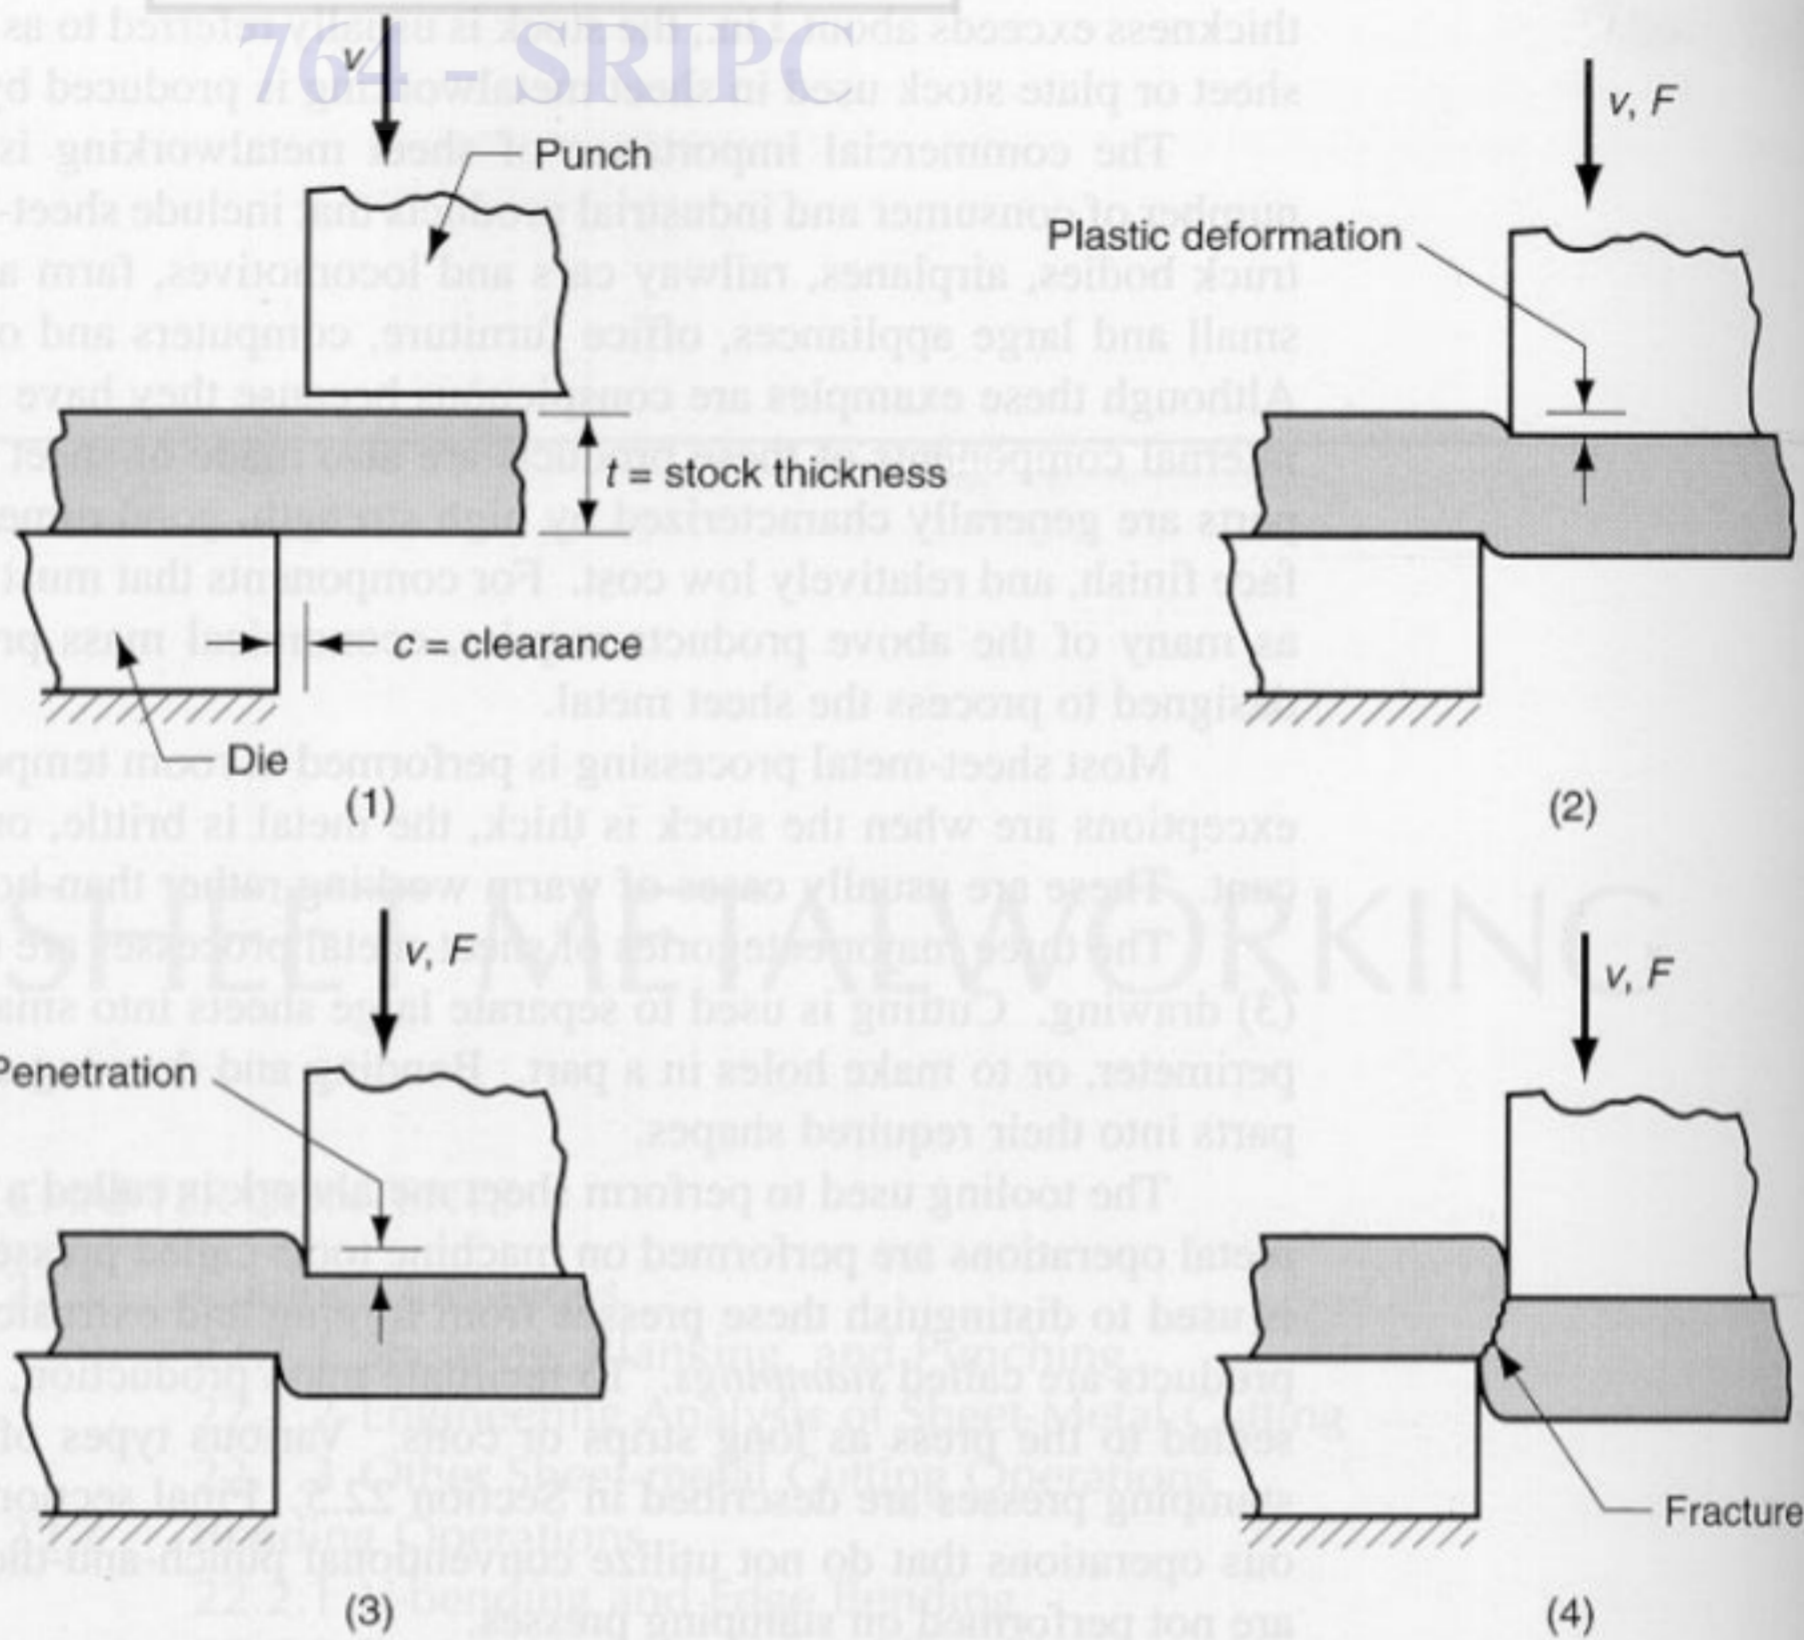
Shearing of sheet metal between two cutting edges: (1) just before the punch contacts work; (2) punch begins to push into work, causing plastic deformation; (3) punch compresses and penetrates into work, causing a smooth cut surface; and (4) fracture is initiated at the opposing cutting edges that separate the sheet. Symbols v and F indicate motion and applied force, respectively.
